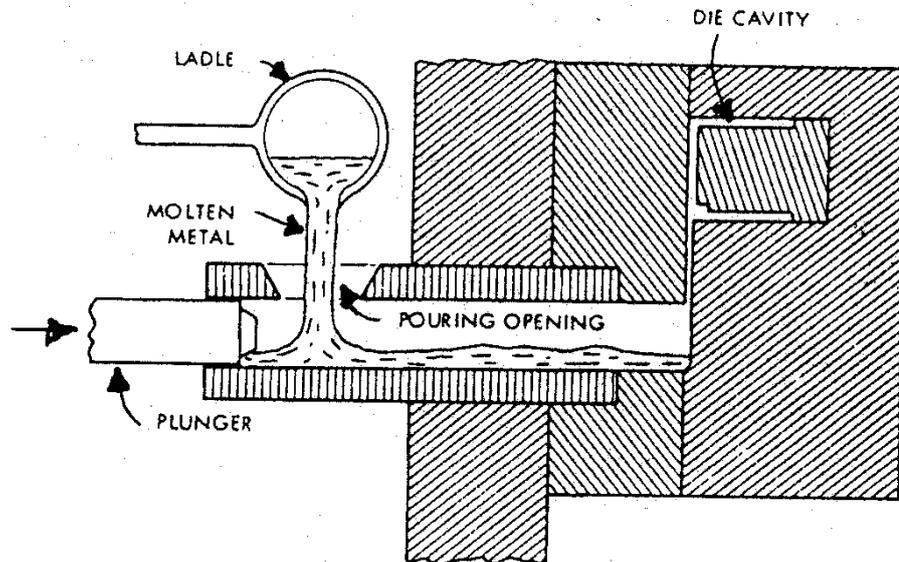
COLD CHAMBER DIE CASTING
